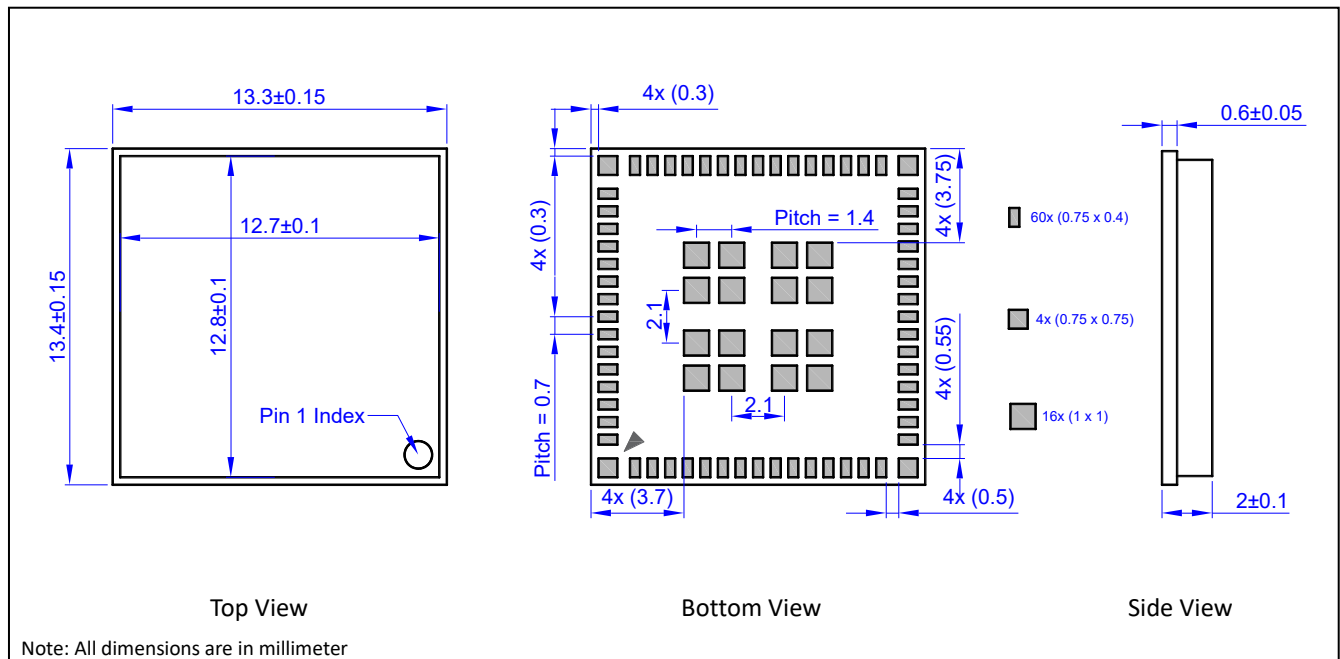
Mechanical Drawing of BDE-BW3351NP2
